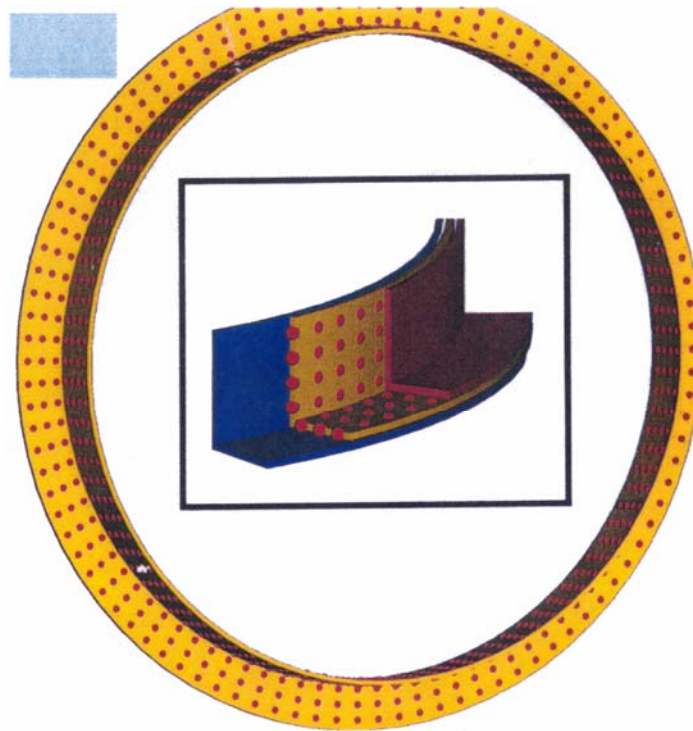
Possible configuration of exoskeletal engine thrust ball bearings.
